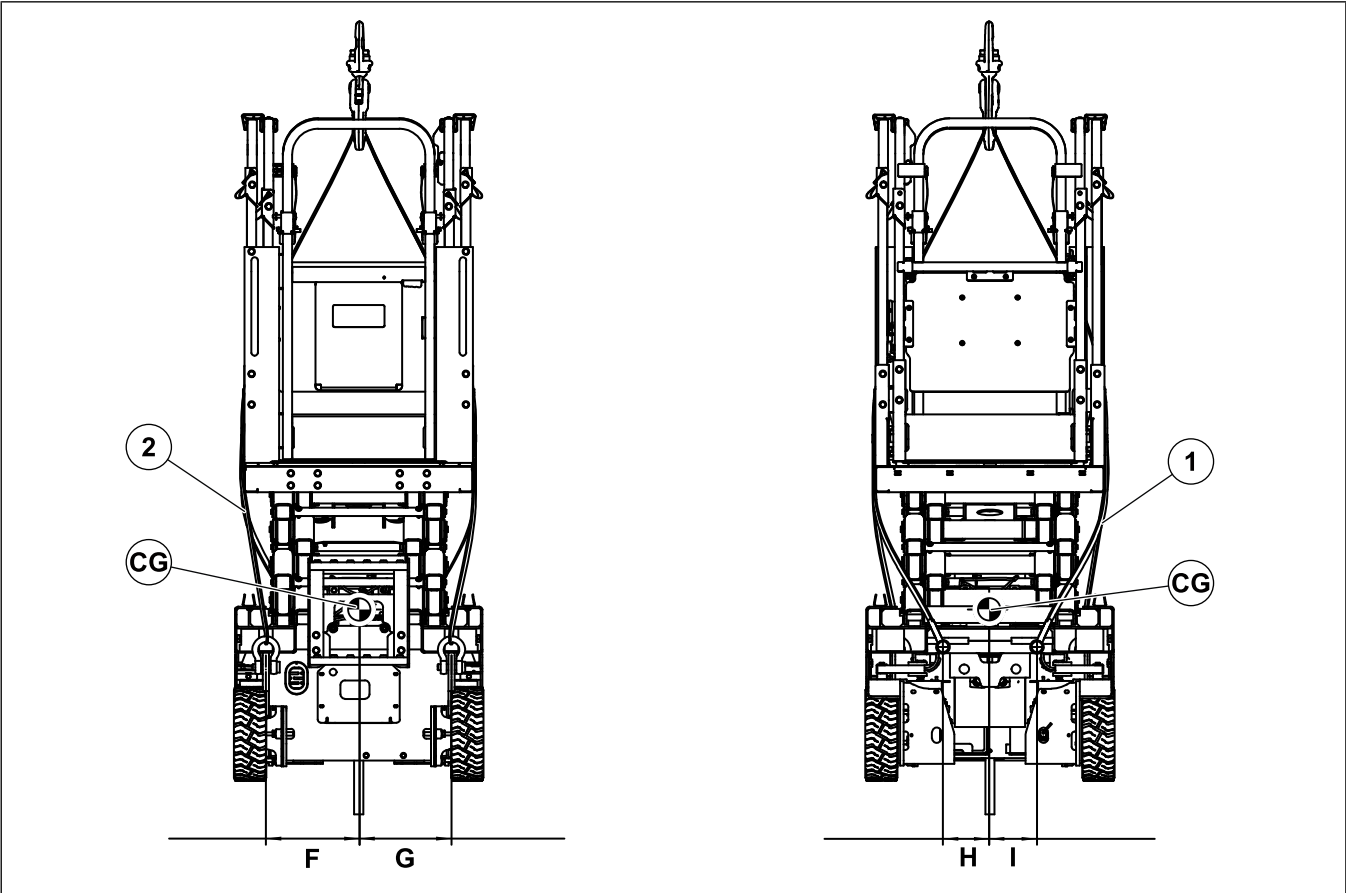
Lifting the machine by means of a crane - SE 0808 S1
